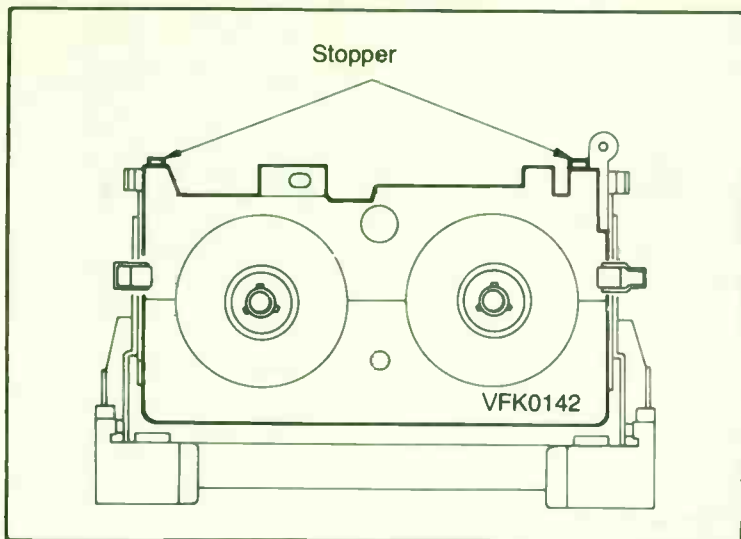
Cassette fixture (courtesy of Magnavox).
